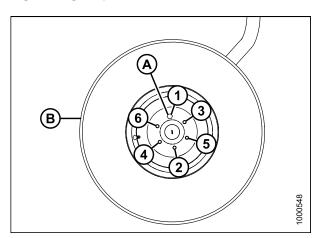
Formed Caster Wheel Nut Tightening Sequence
